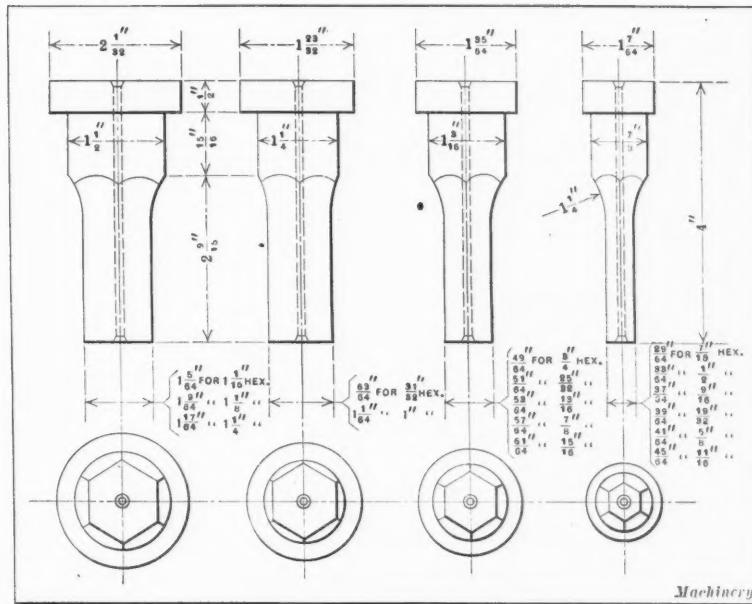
Dimensions of Punches for Hexagonal Holes in Wrench Sockets
